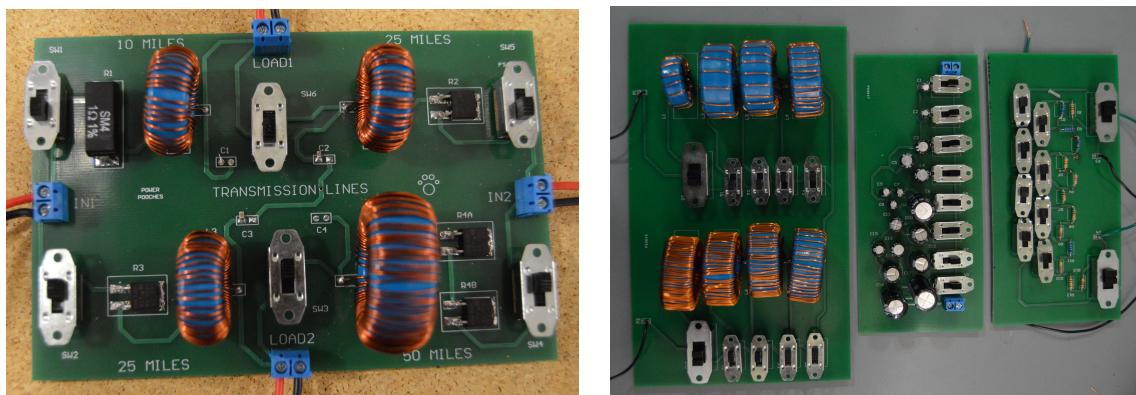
Transmission Line PCB (Left), Load PCBs (Right)
